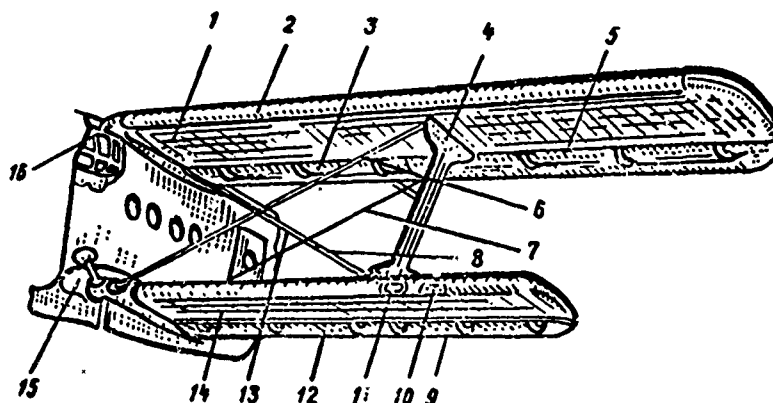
Wing cell: 1 - detachable part of upper wing; 2 - slat; 3 - flap; 4 - biplane strut; 5 - aileron; 6 - front lift wire strips; 7 - aft lift wire strips; 8 - supporting wire strips; 9 - tip flap of lower wing; 10 - taxiing light opening; 11 - landing light opening; 12 - root flap of lower wing; 13 - strip holder; 14 - detachable part of lower wing; 15 - fuselage fillet with wing center section; 16 - upper wing fillet with fuselage.
